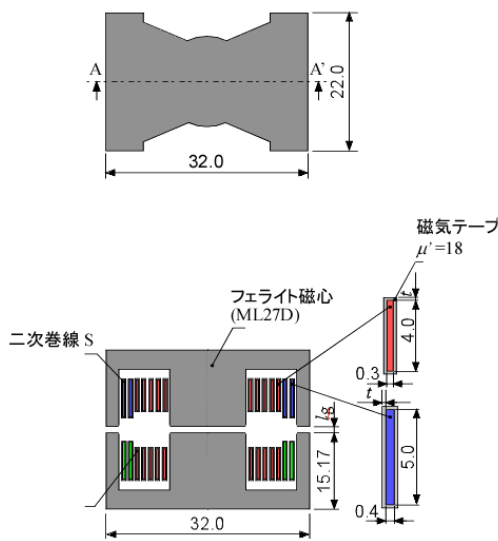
Transformer Structure (Unit: mm)
